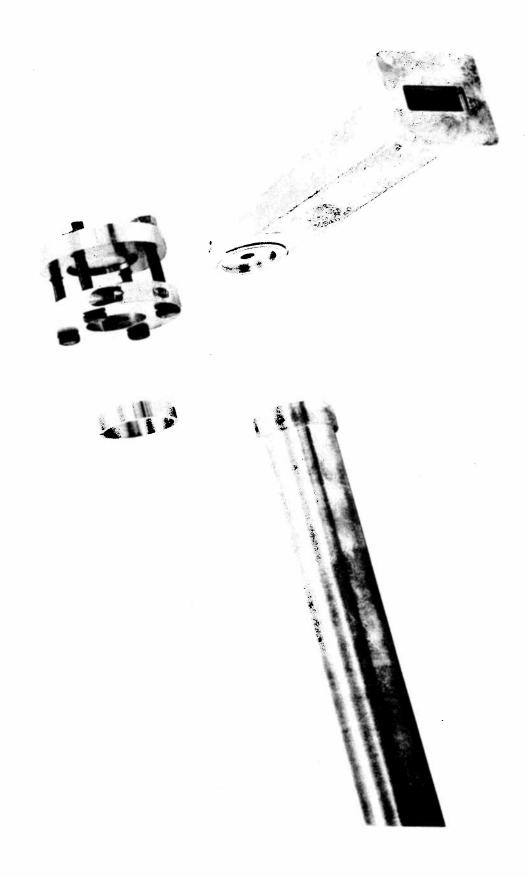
Input coupler, accelerator, gold ring and clamps for gold-diffusion joint.
